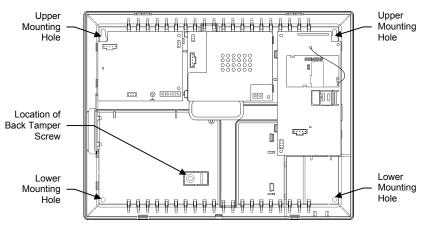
Back Cover (Main Board and Battery Pack removed)
